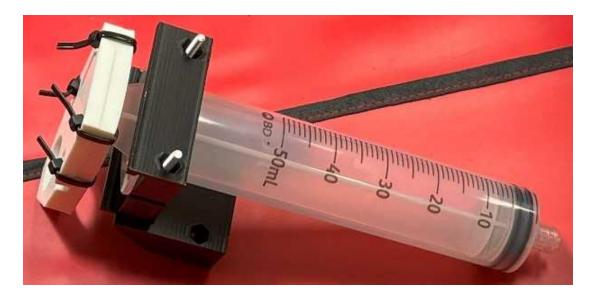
3-D printed parts #4 and #6 attached to the syringe barrel.
